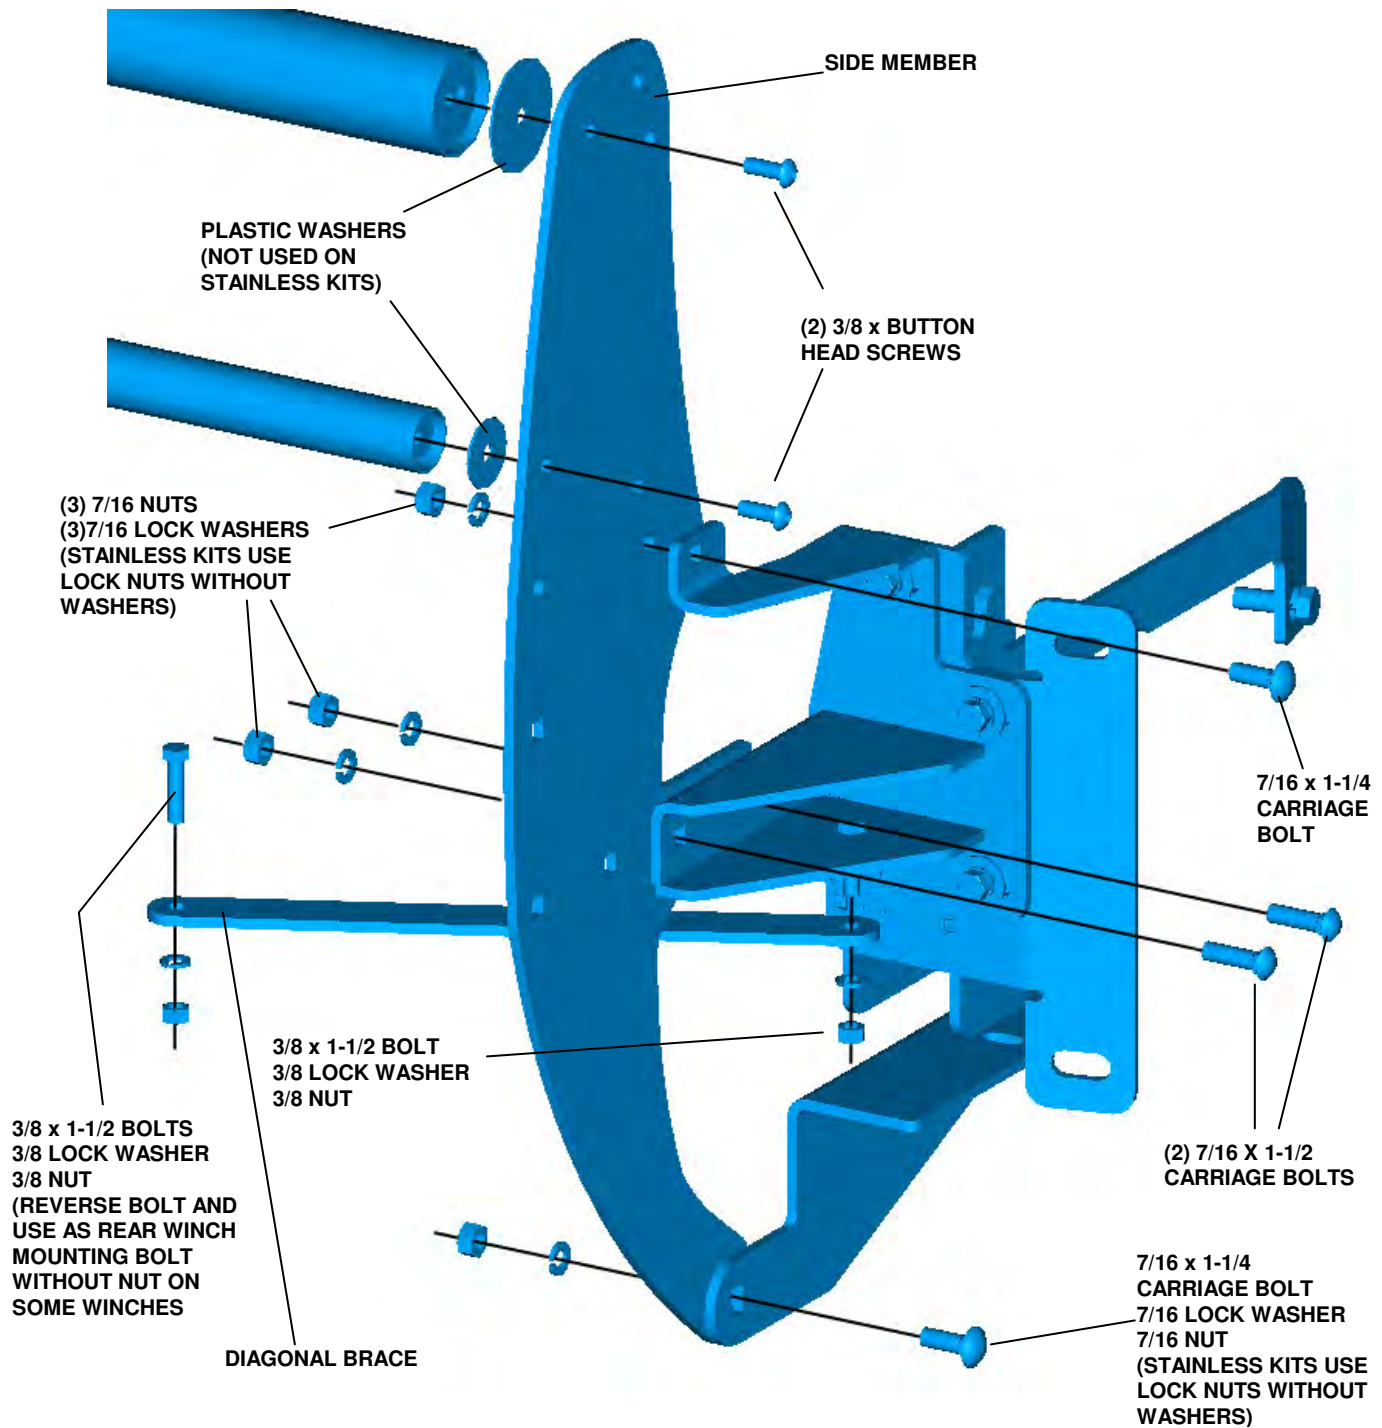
Side Member, Diagonal Brace and Center Tubes (Bumper and grille not shown for clarity)
